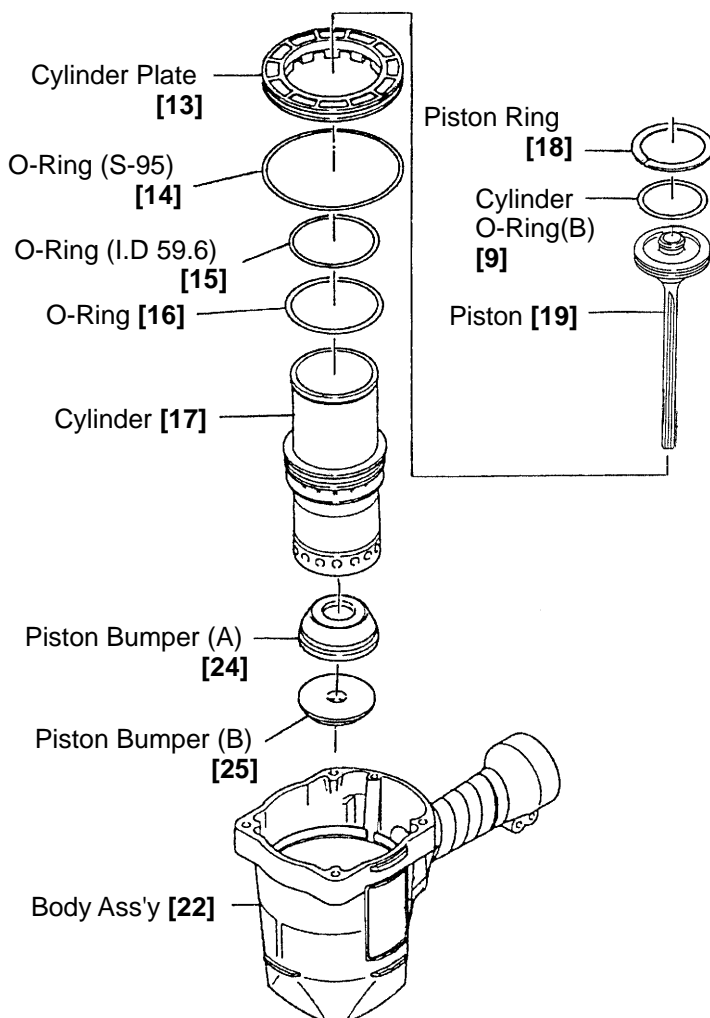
Disassembly and reassembly of the Cylinder, Piston, Piston Bumper, etc.
